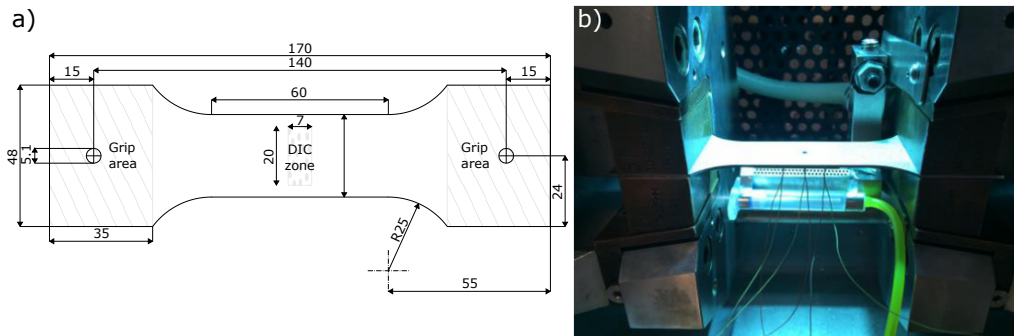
Uniaxial tensile test: a) Sample geometry; b) Test sample in the Gleeble 3500 machine.
